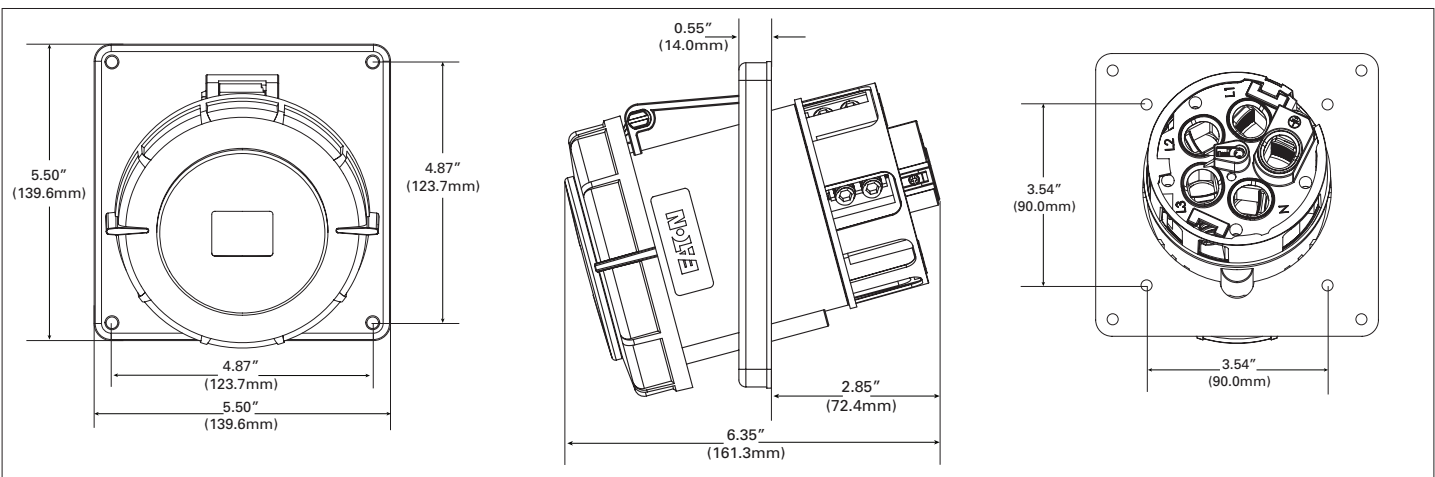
100A Angled Receptacle, Front, Side & Back Views
